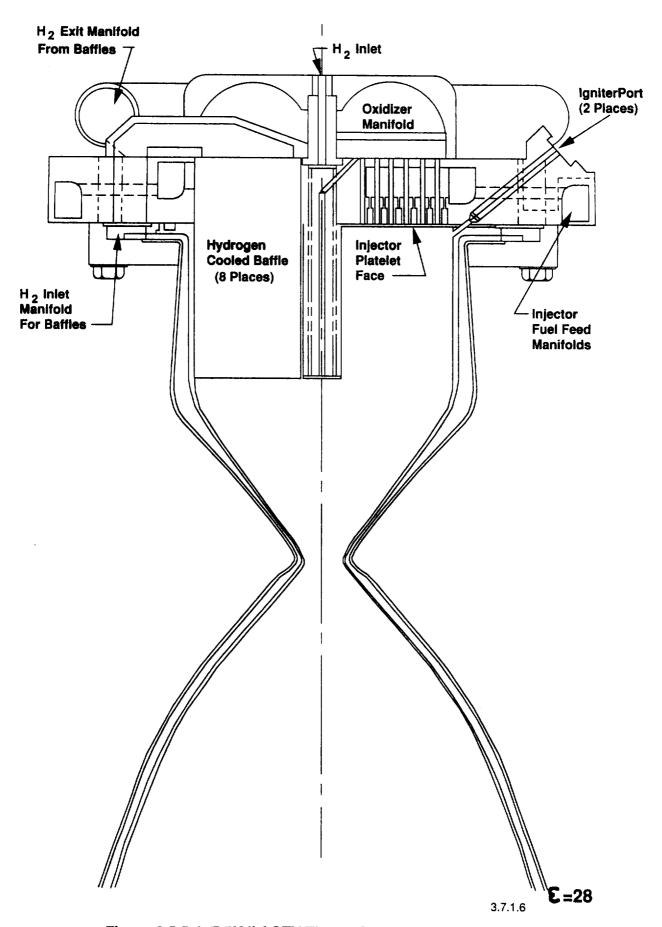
7.5K lbf OTV Thrust Chamber Assembly Concept
